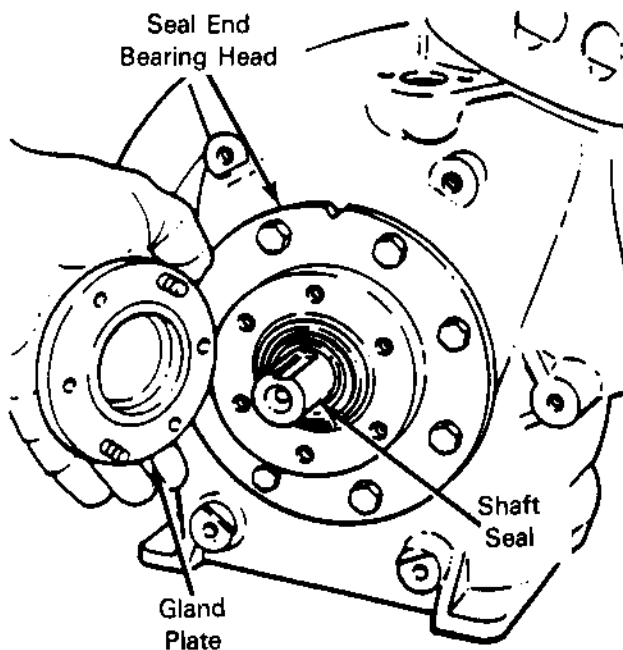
Shaft Seal Positioned In Seal End Bearing Head
